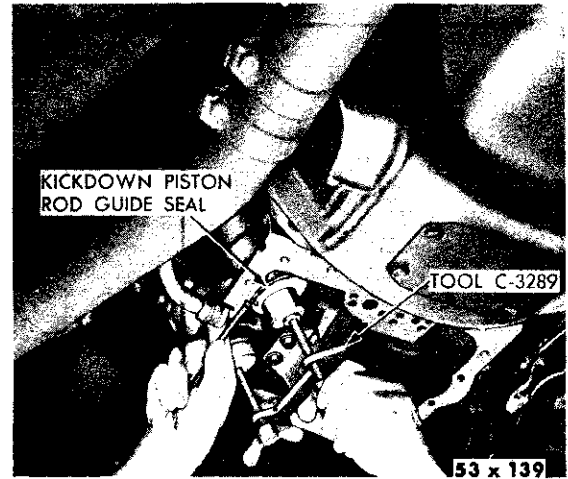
Positioning Kickdown Piston Rod Guide Seal (Typical View)
